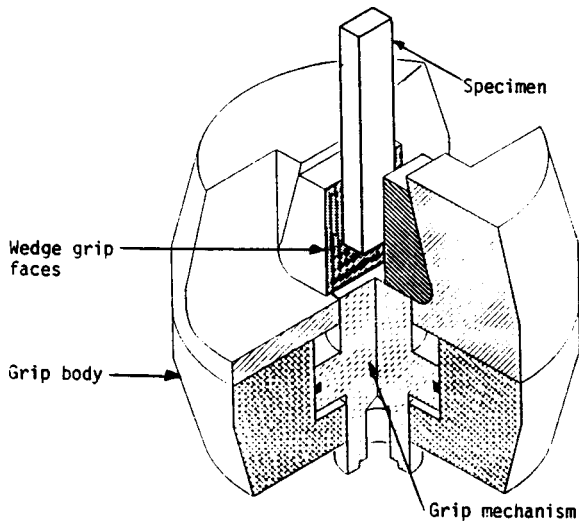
Example of a Smooth, Wedge Active Gripping System for Flat Specimens
